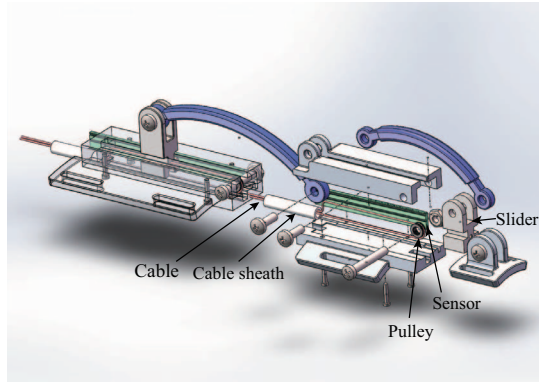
Exploded view of the proposed index finger exoskeleton's Solidworks model
